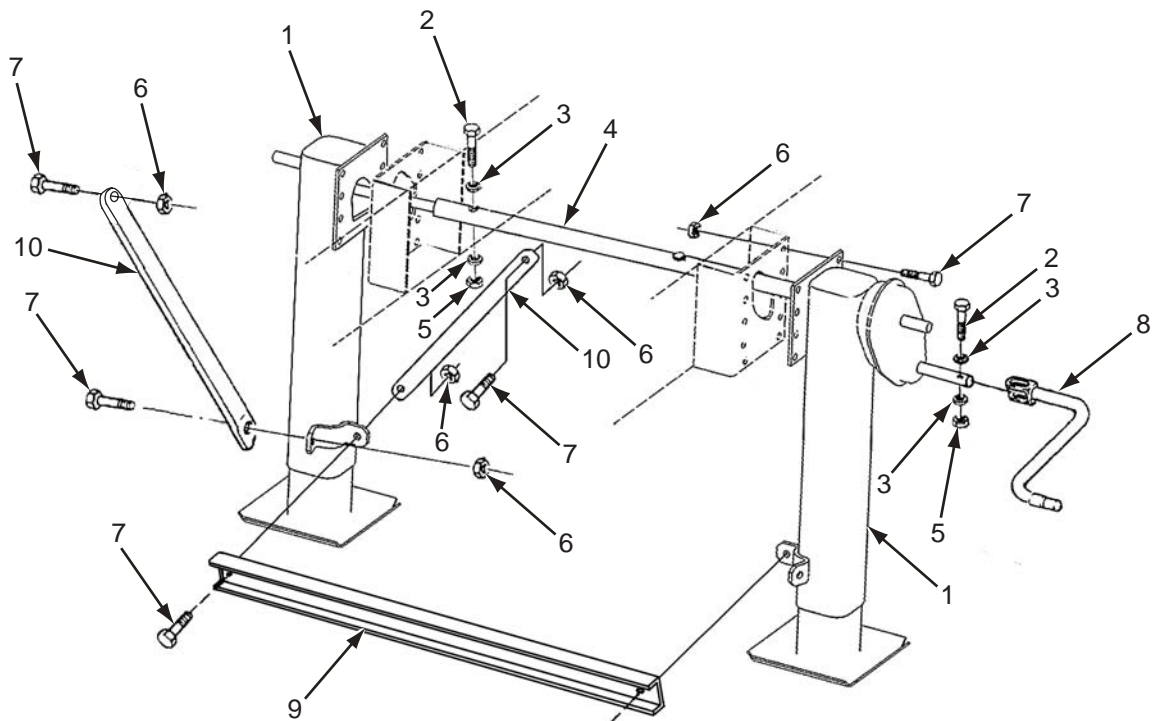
LANDING GEAR AND MOUNTING HARDWARE
